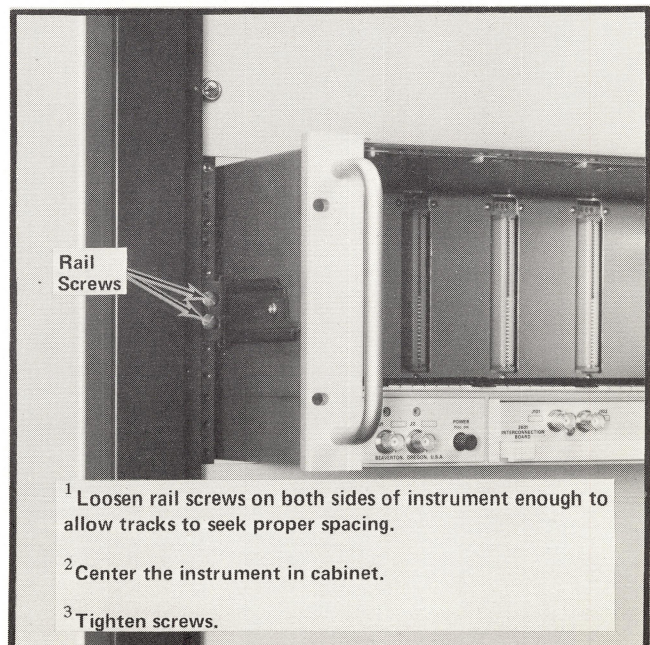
Adjusting the slide-out tracks for smooth sliding action.
